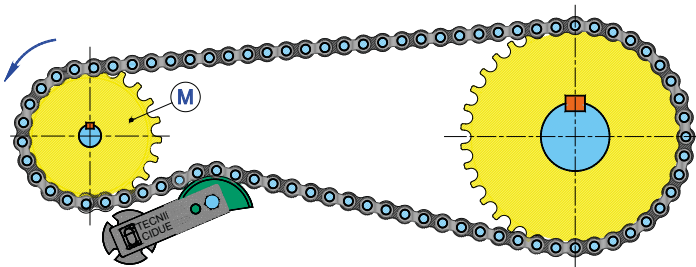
CORRECT mounting (RECOMMENDED!)
